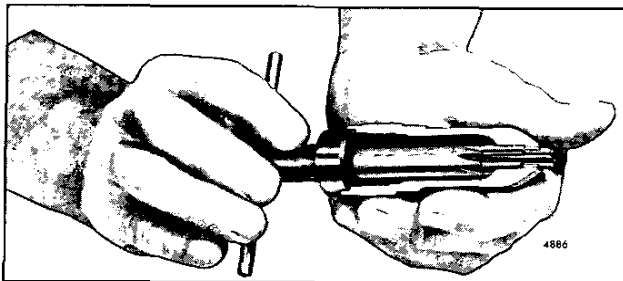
Cleaning Injector Nut Spray Tip Seat Using Tool J 4986-01
